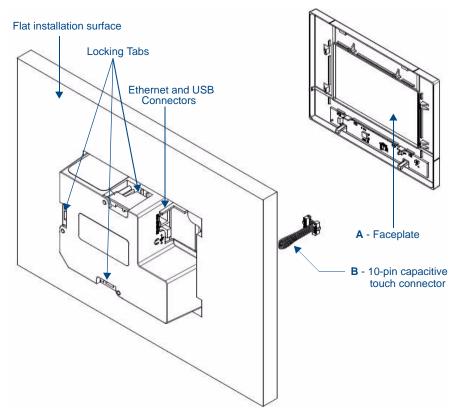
Wall Mount panel installation configuration for flat surfaces
